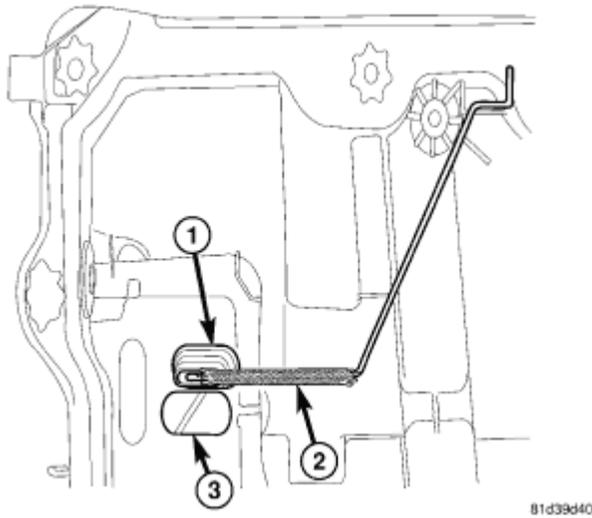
Grommet, Interior Handle Lock Rod & Carrier
